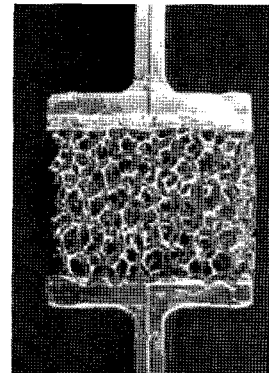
Attachment of chuck plate for tensile test by insert casting.
